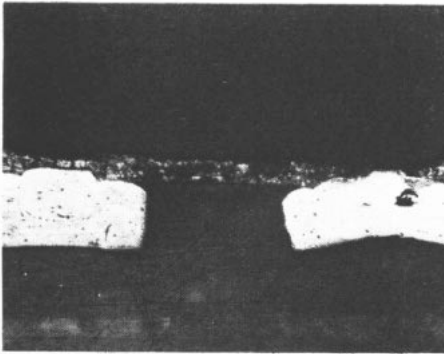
Bracket flanges welded to a stainless steel band. A proper weld is shown on the left. X 100
